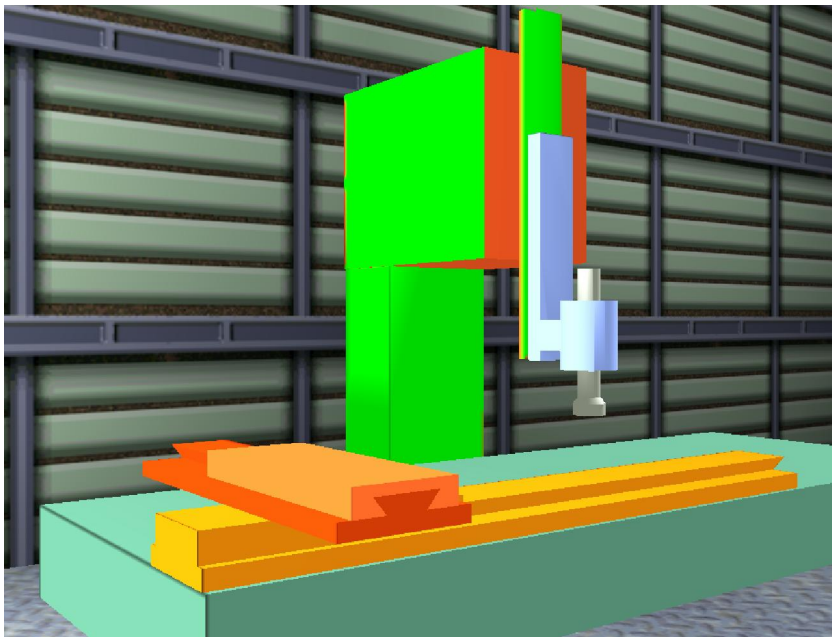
A view of the virtual environment. The reconfigurable machine tool configured as milling machine
